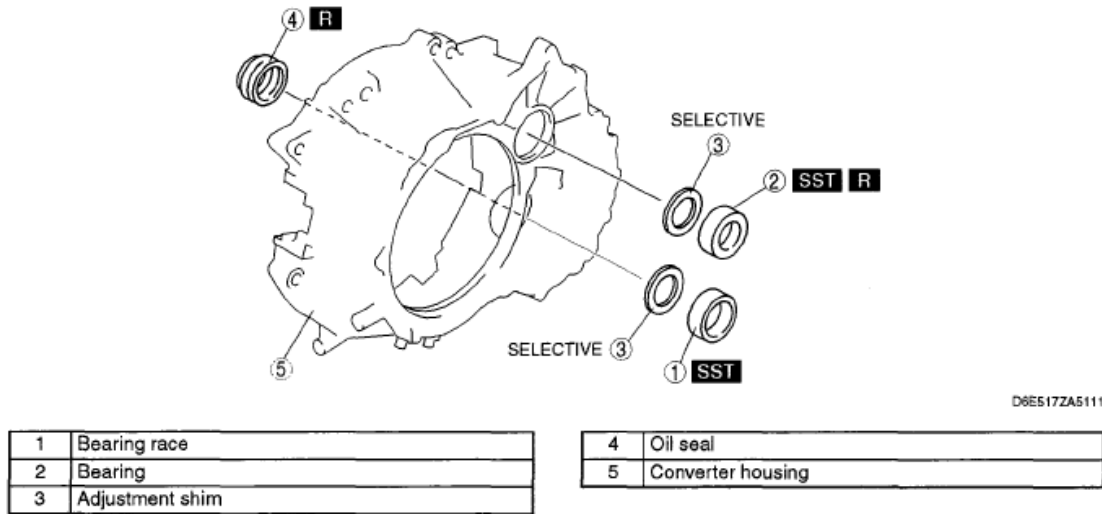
Exploded View Of Automatic Transaxle Components (4 Of 4)
